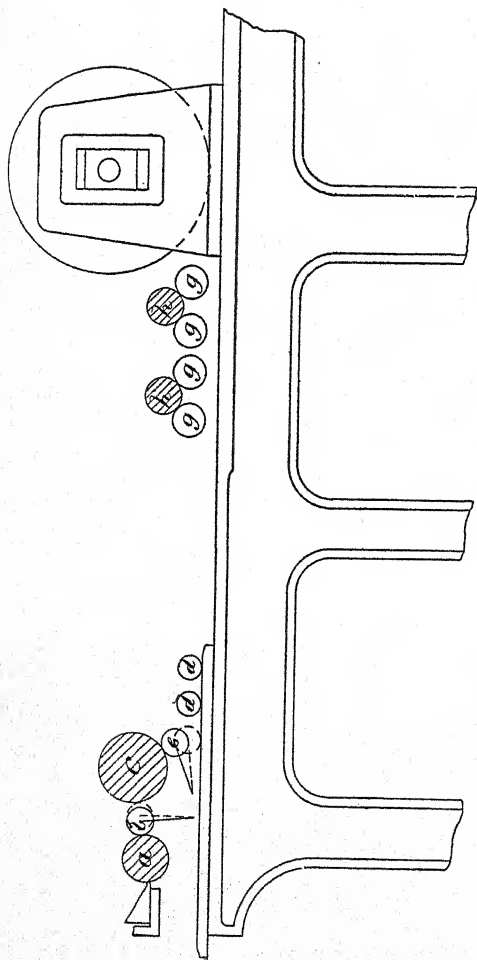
GEARED INKING APPARATUS, WITH DISTRIBUTING DRUM.
